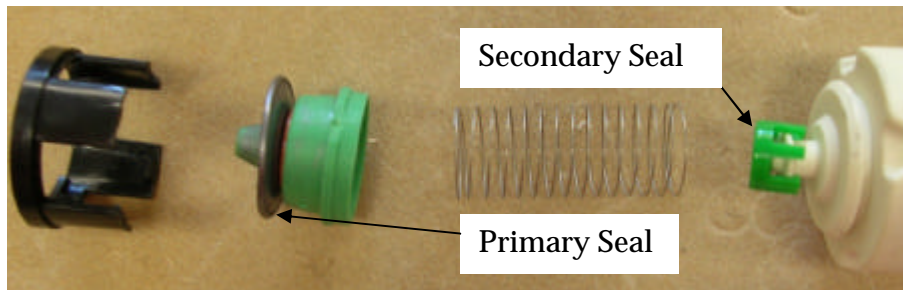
Dodge Neon secondary vapour valve - disassembled.
